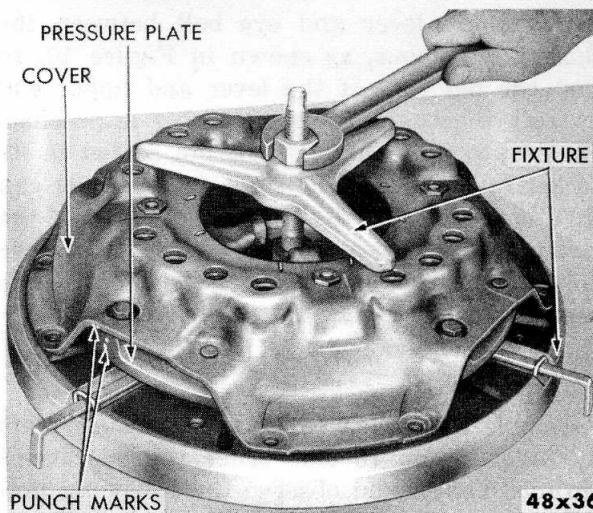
Clutch Cover and Pressure Plate Assembly in Fixture C-585-B
